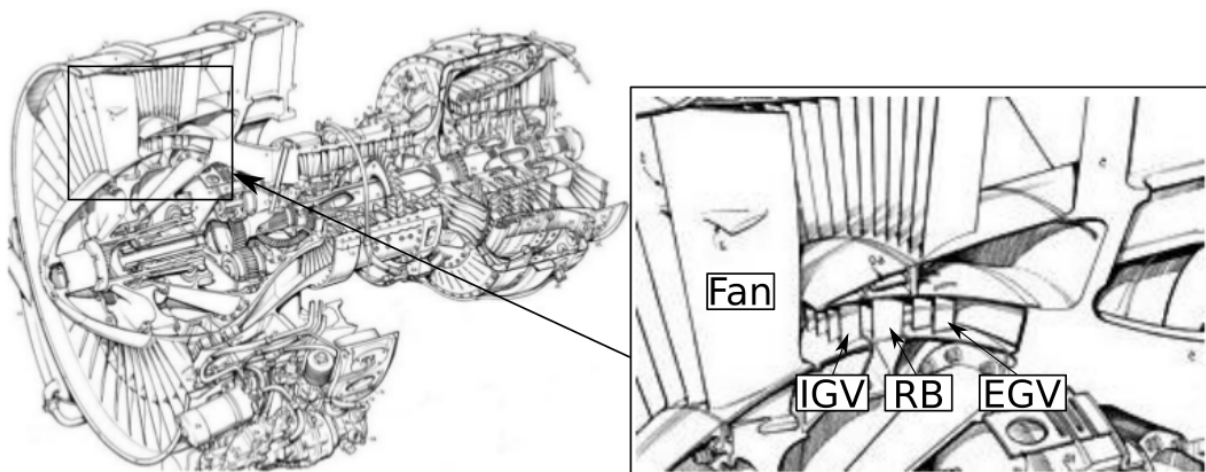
Sectional view of the ALF502R-5A Honeywell turbofan engine, zoom on the single stage LPC illustrating the Inlet Guide Vane (IGV) stator, the rotor blade (RB) and the Exit Guide Vane (EGV) stator tandem - Adapted from [153]
